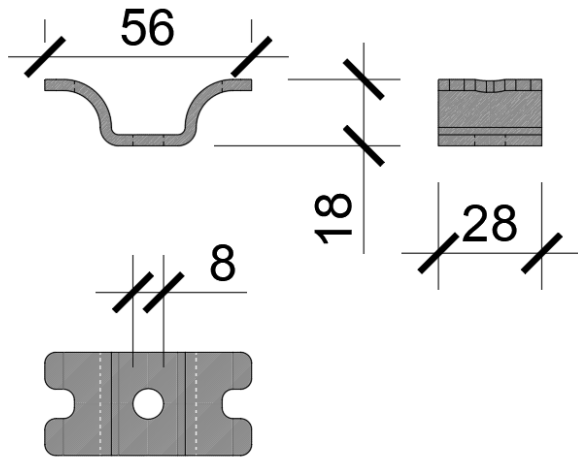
h Mini Connettore Legno L70 without screw 8x70
